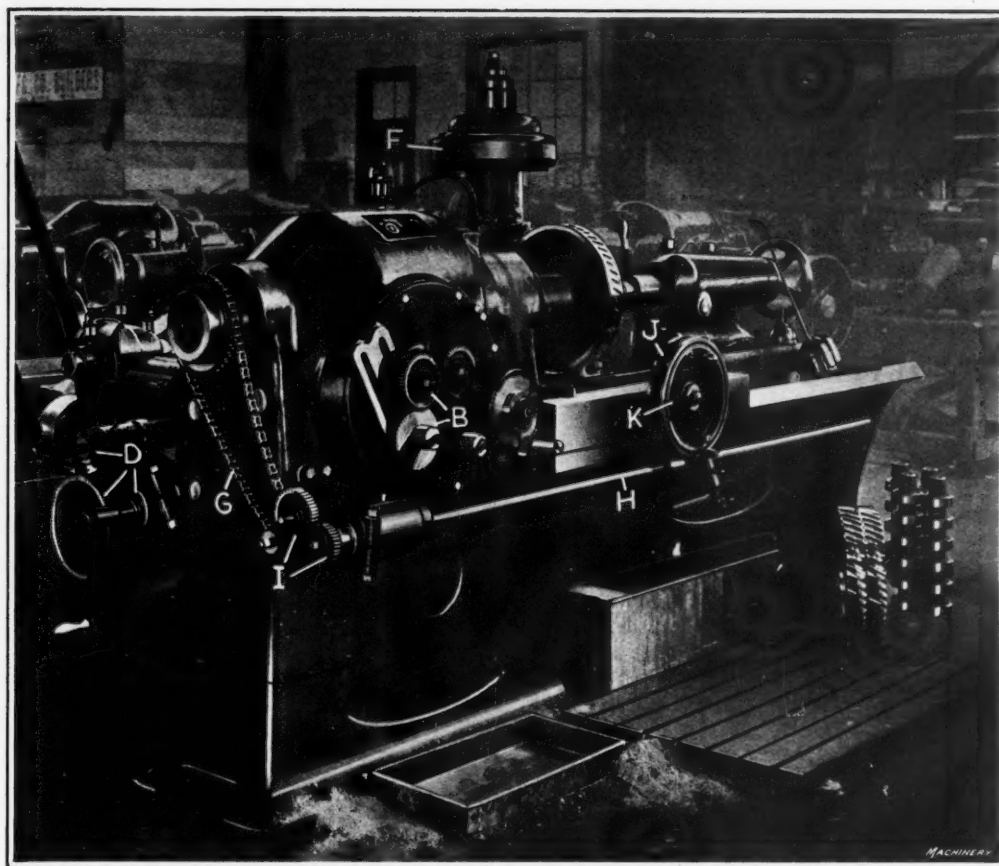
Machine shown in Fig. 1 set up for hobbing Worm-wheels
